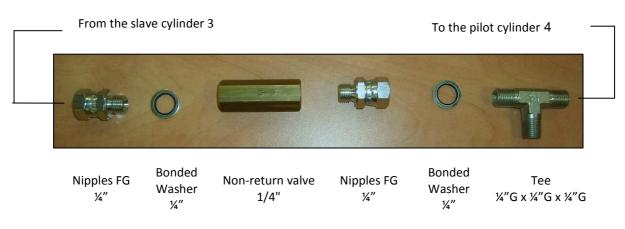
Non-return valve assembly in a multi-cylinder system with directional valves
